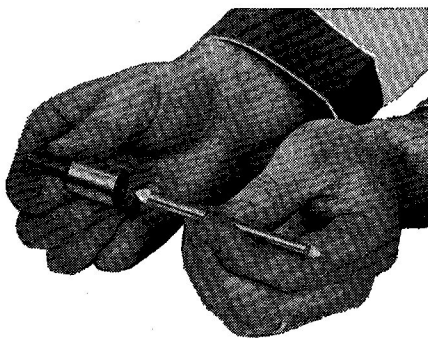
Valve seat and upper chamfer are cleaned by using scraper as shown. Refer to text.
